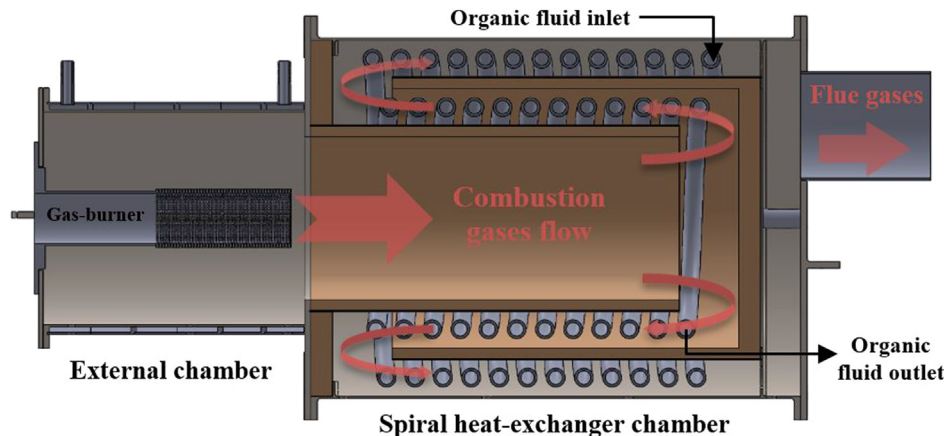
3D CAD view of an axial cut of the gas burner and evaporator of the first prototype of the micro-CHP.
